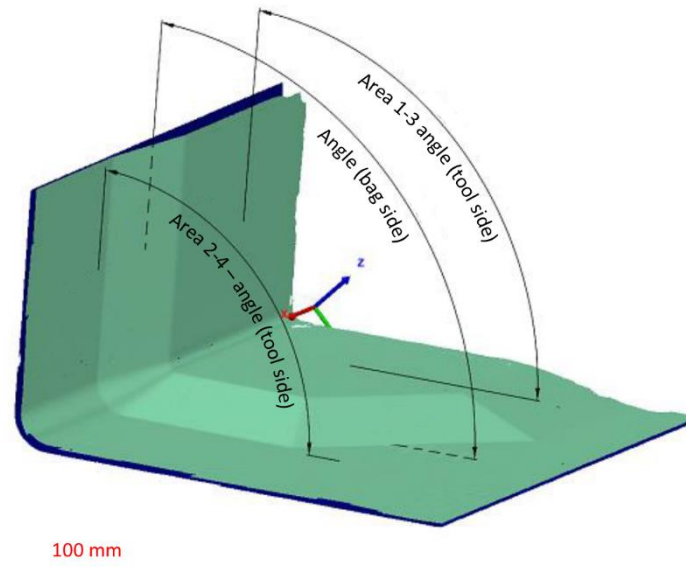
Different angles between the flanges of the demonstrator investigated on demonstrator laminate (green: tool side; blue: bag side)
